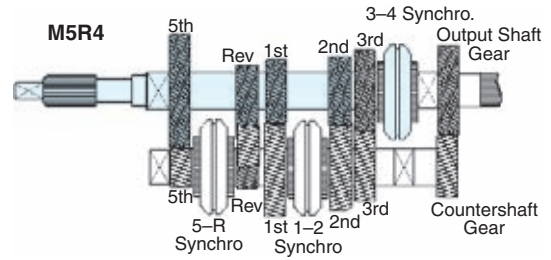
The M5R4 five-speed transmission has a long input shaft with four fixed gears, one speed gear, and the 3–4 synchronizer assembly. The countershaft has two fixed gears plus two synchronizer assemblies and four speed gears. The mainshaft has only one fixed gear and the dog clutch teeth for fourth gear (direct drive).
